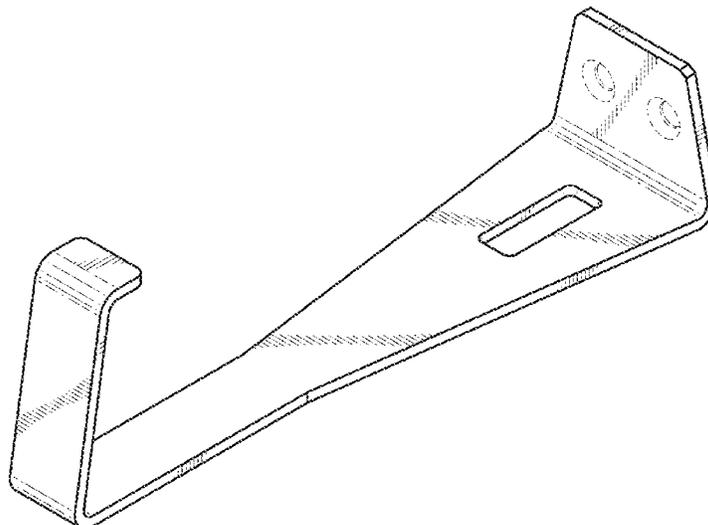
is a perspective view of the mounting apparatus showing our new design;
